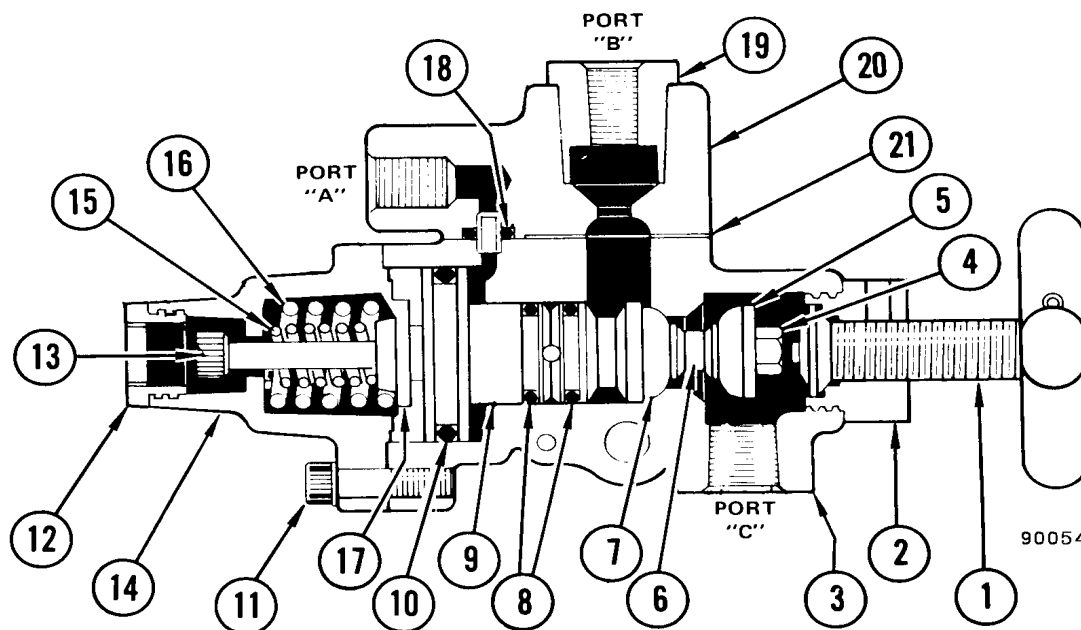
AUTOMATIC/MANUAL DRAIN VALVE ASSEMBLY
